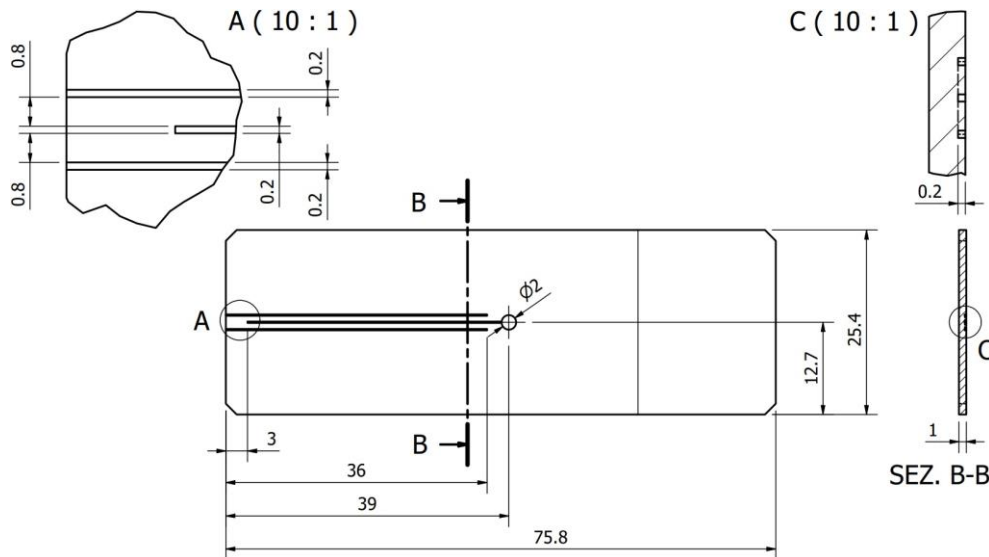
ISO technical drawing of the glass layer (dimensions in mm).
